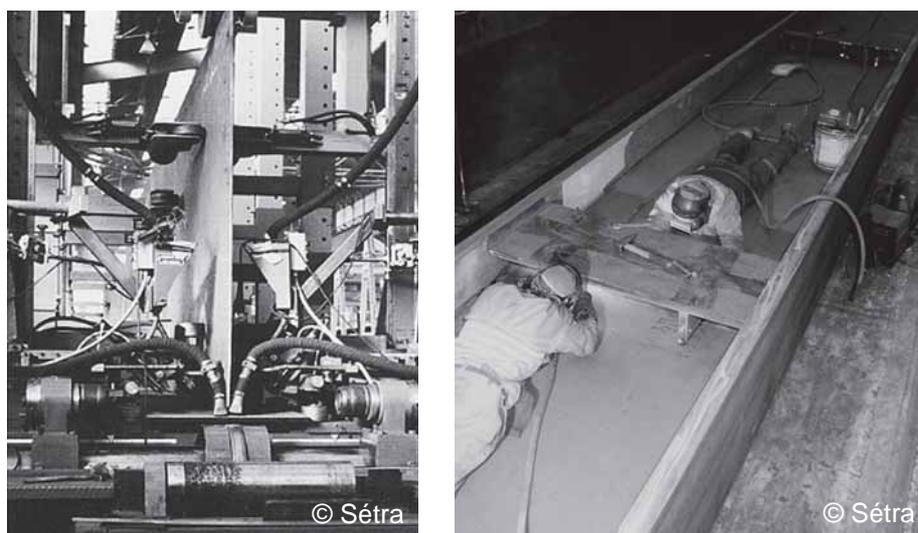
Built-up of a bridge I-girder and welding of transverse stiffeners.
